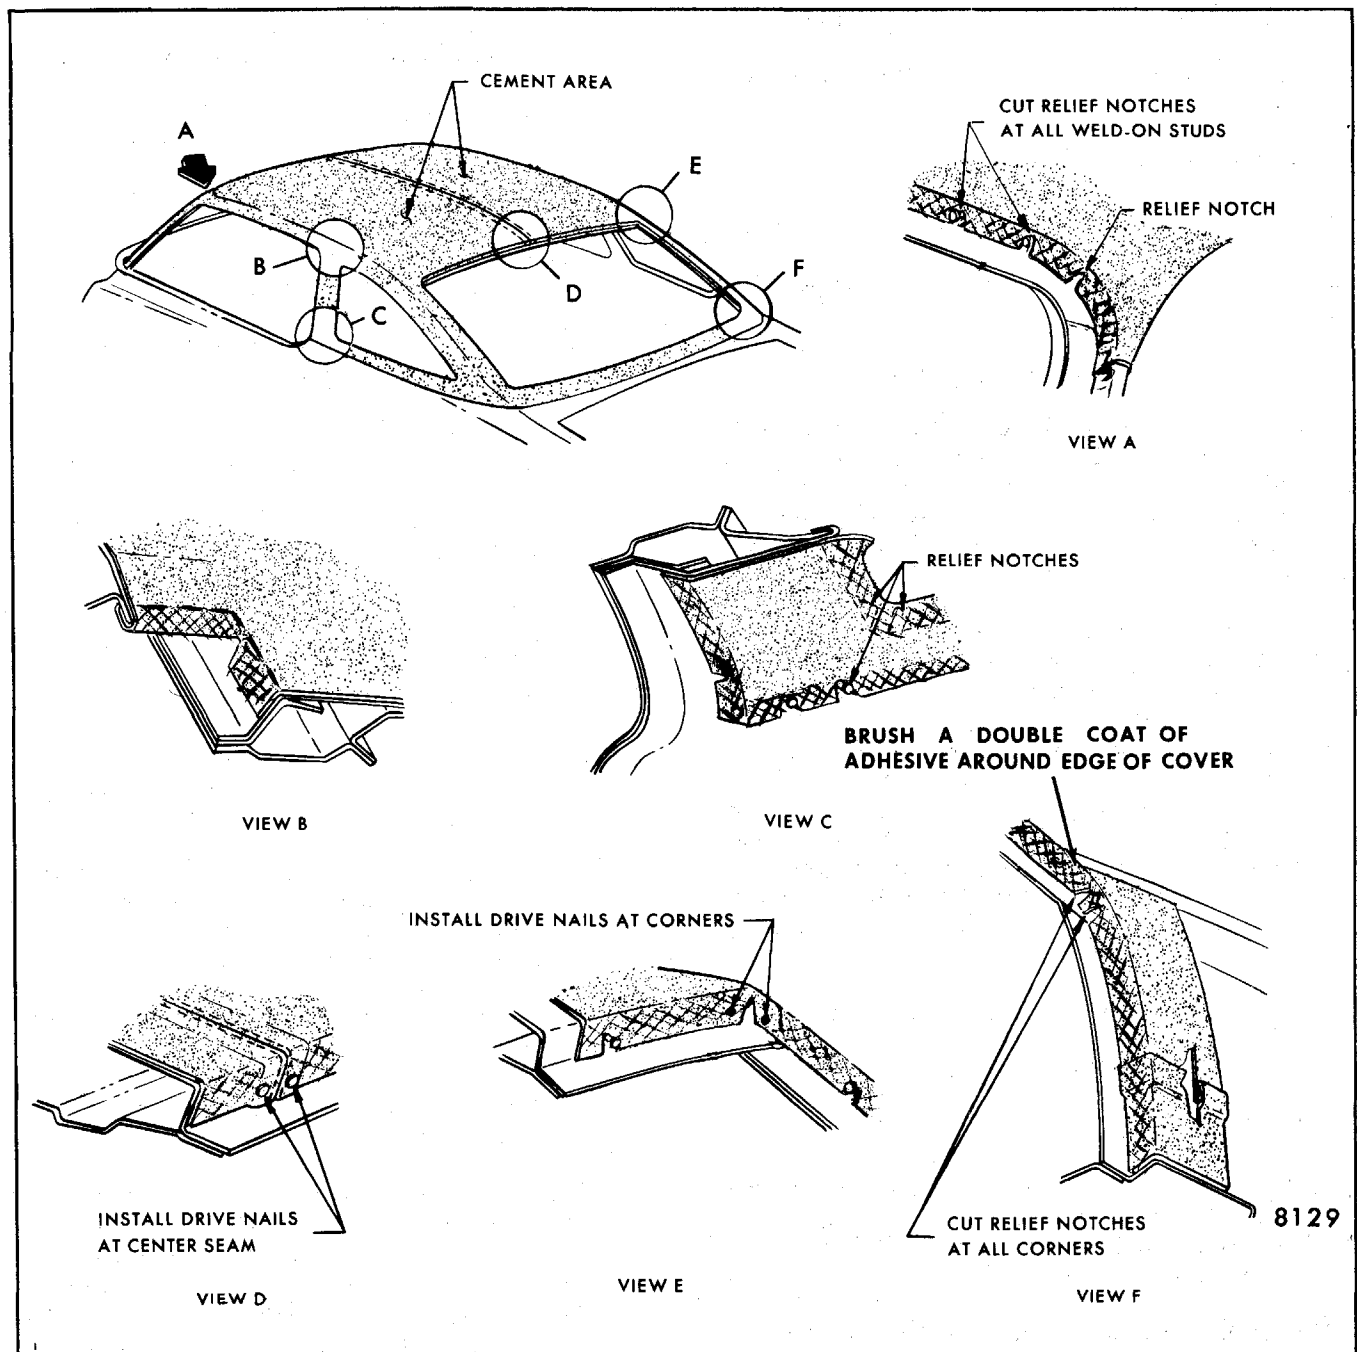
Typical Fabric Roof Cover Installation - "A" Styles
